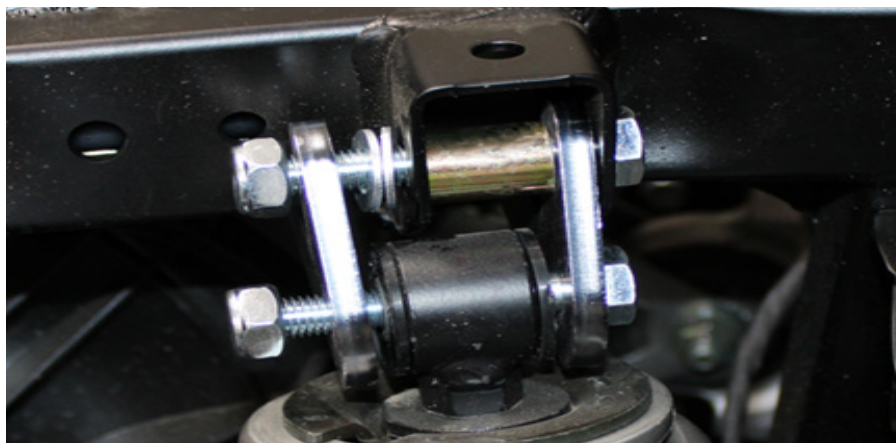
Loosley fasten Rear Lift Brackets to Frame
